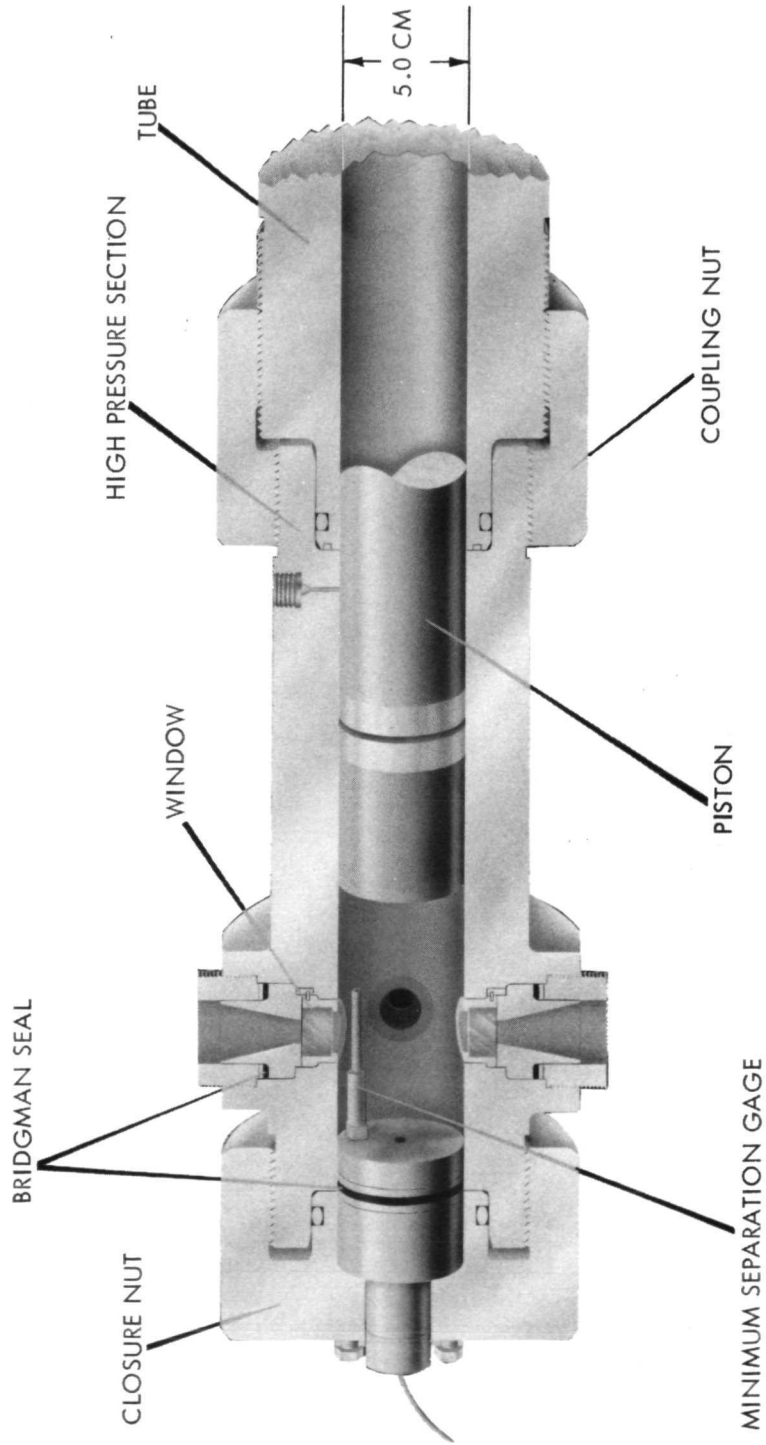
4- PORT TEST SECTION ASSEMBLY WITH MINIMUM SEPARATION GAGE
